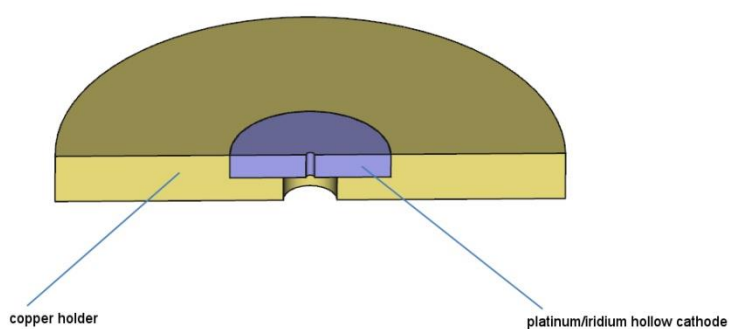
Cross section of the used hollow cathode assembly for serial axial μ CHCD - version 2.
